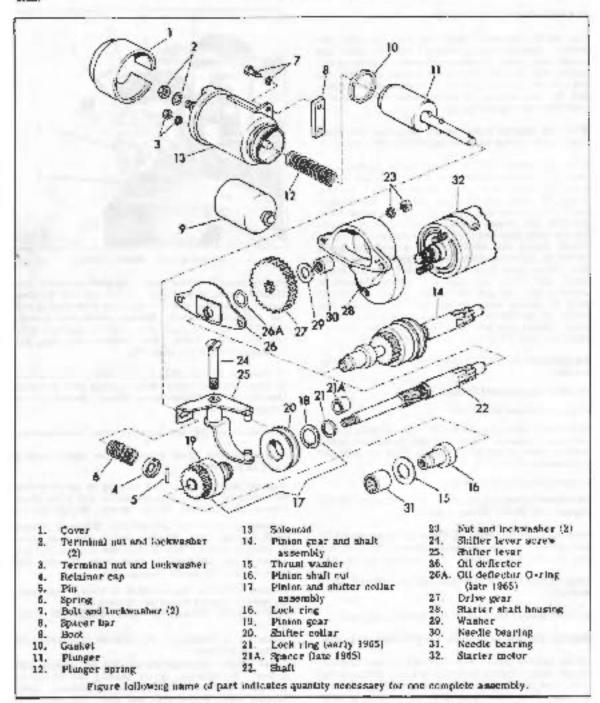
C-1D. Starter Shaft, Housing and Solenoid, - Exploded View
